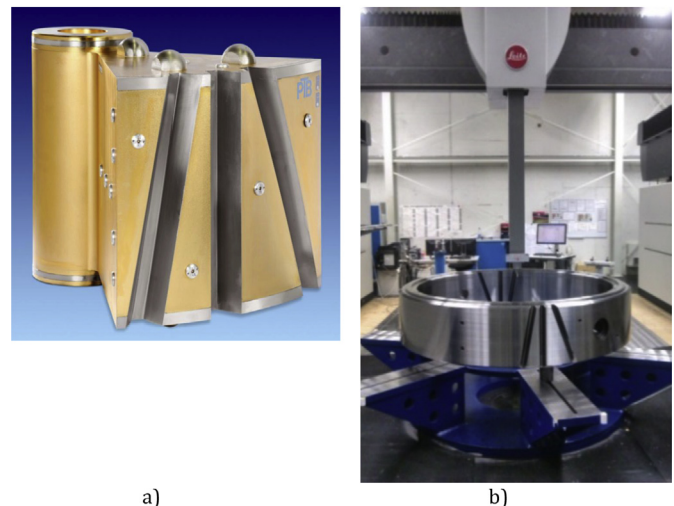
Involute gear standards segment (a) and workpiece-like (b). Source: PTB Braunschweig.
